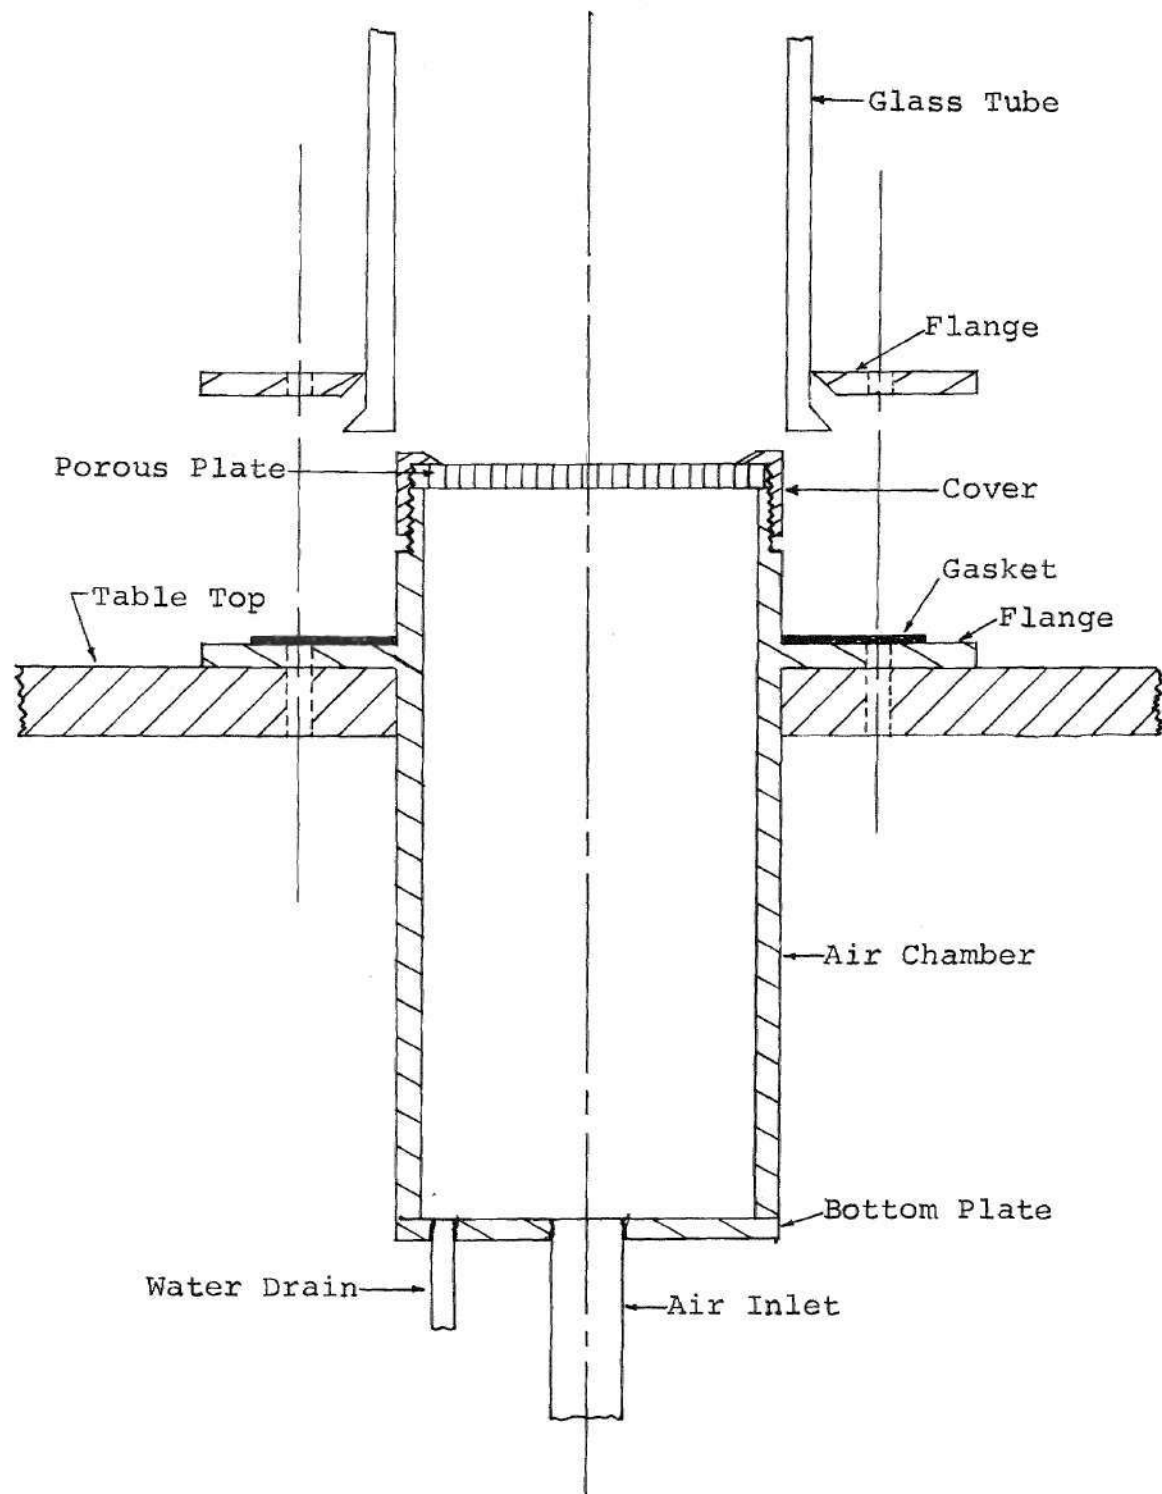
Cross Section of Air Chamber and Lower Assembly for the 4.0 Inch I.D. Test Section
